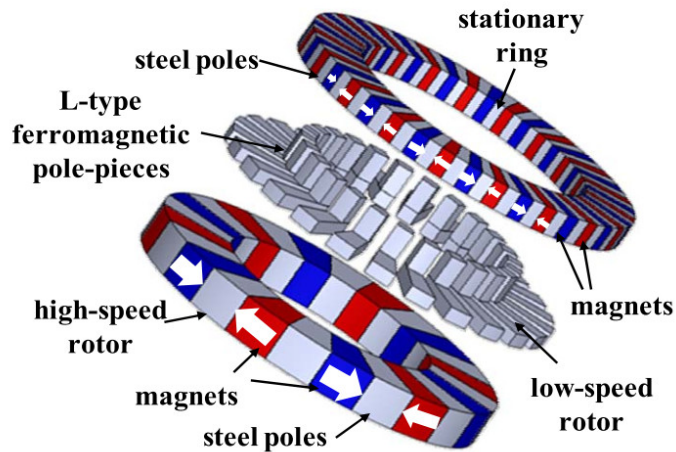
The axial field flux focusing magnetic gear with L-shaped ferromagnetic pieces [52].
